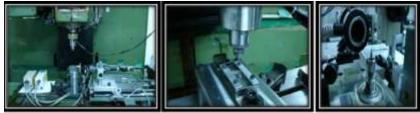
(Top) Micro-drilling machine and machine vision unit, (Bottom) Air spindle and work piece fixture & Illumination and measurement unit.
